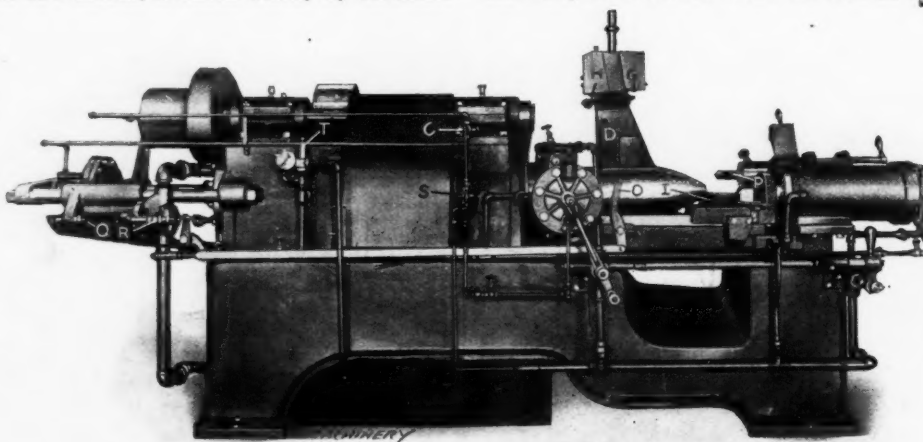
Front View of Machine with Tool Carrier lifted to throw Tools out of Contact with Work
